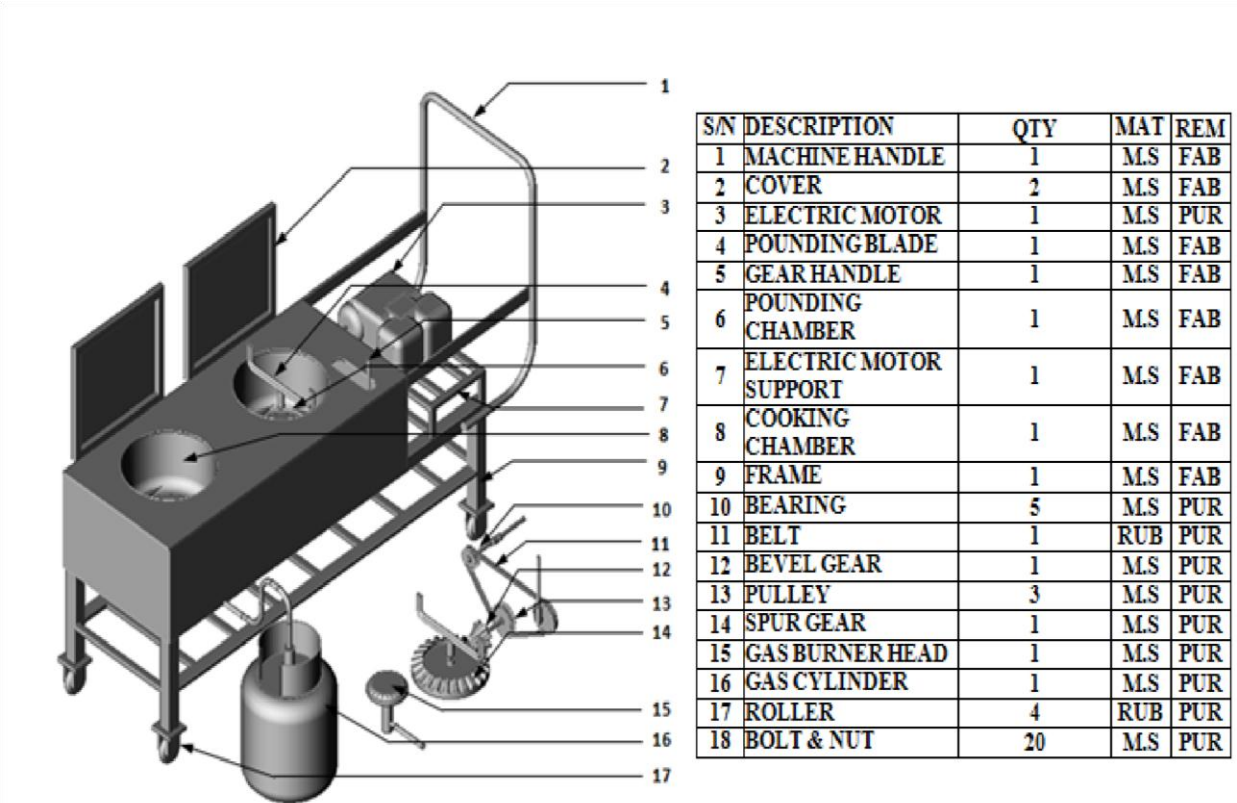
The isometric view of onuoha machine showing the various parts.
